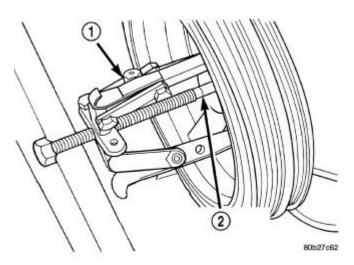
Crankshaft Damper-Removal Courtesy of CHRYSLER LLC
